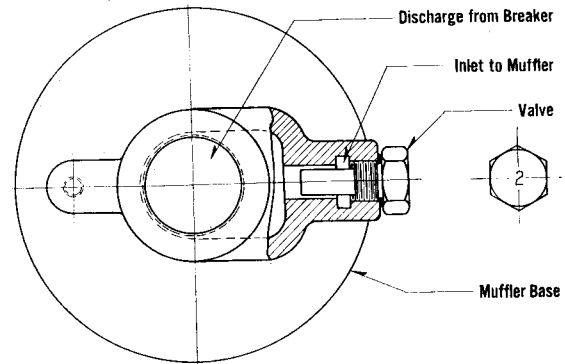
MUFFER BASE SHOWING SECTION OF THE VALVE
